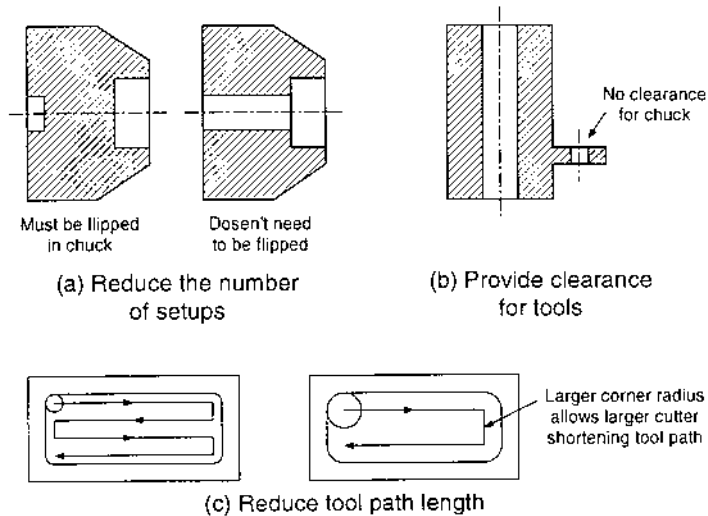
Approaches for simplifying the machining of a casting. (From Ref. 7.)
